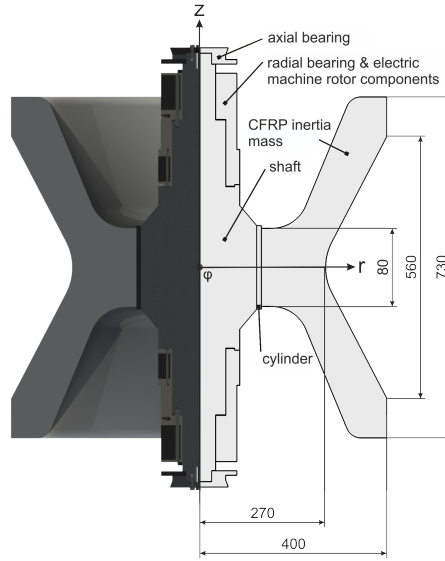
Flywheel rotor consisting of the CFRP inertia mass, shaft (aluminium), bearing and motor components (soft magnetic iron) and a steel cylinder to optimize the press-fitting process; dimensions in mm.
